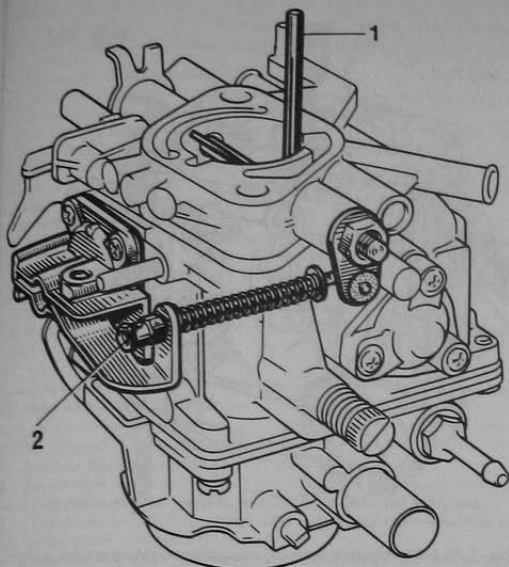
Accelerator pump stroke - Solex carburettor (Sec 17)
